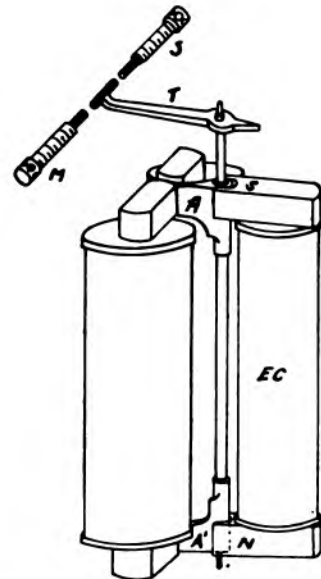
SIDE VIEW, SHOWING COIL ARRANGEMENTS.
